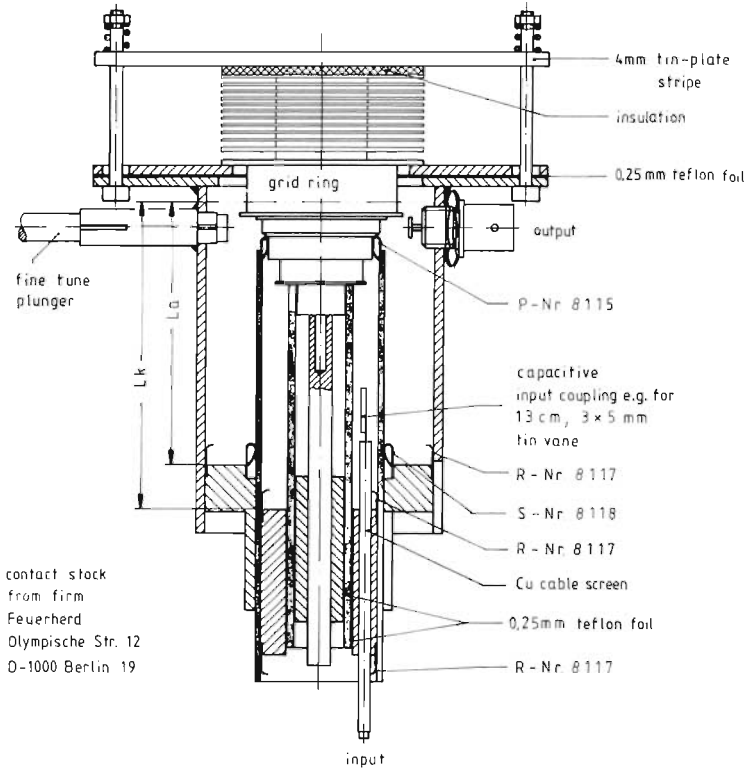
Coaxial PA for 70 cm, 23 cm or 13 cm using the tube TH 6885 or TH 021 A
